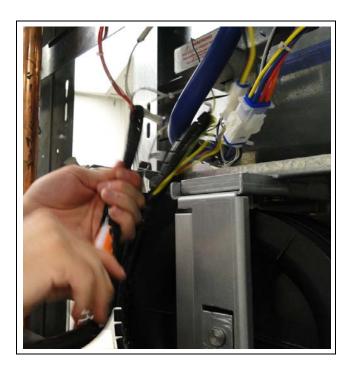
Placing the DC Cables in the Wire Guard Installation Tool
